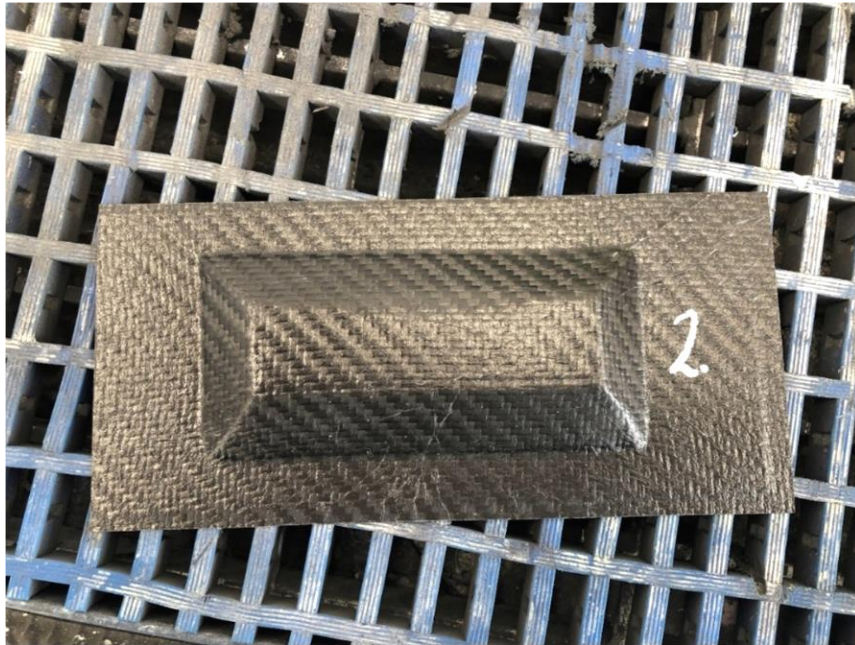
showing the lower corner has been cracked because of poor mould preparation and inserting a wedge that was too large. Some evidence of surface imperfections caused by the wrinkling of the moulding consumables.
